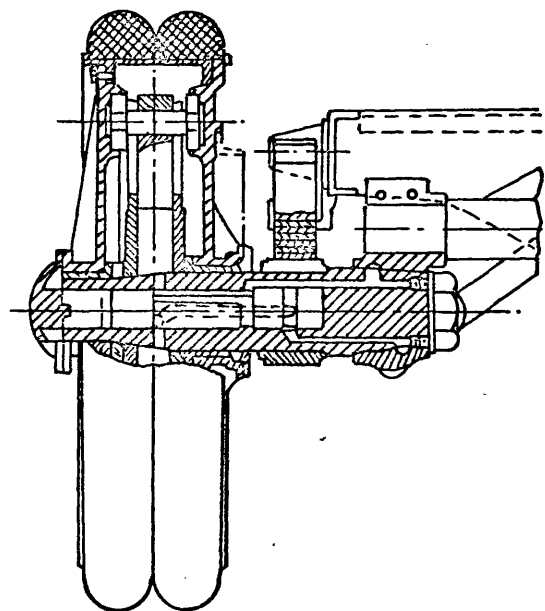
THE HELE - SHAW ROTARY PUMP & MOTOR UNIT.
